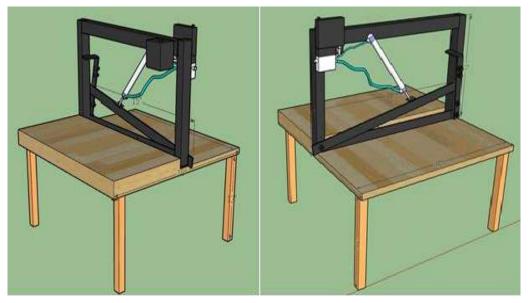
Pneumatic sheet cutting machine 3D design.
